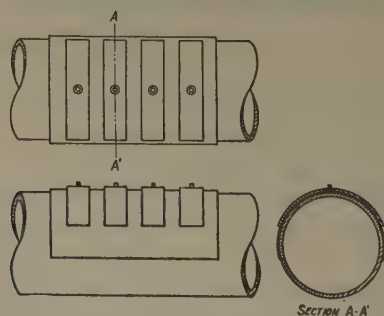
METHOD OF SUPPORTING TEST SPECIMENS ON SURFACE PREHEATERS AND ON SURFACE COOLERS.
